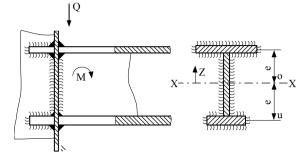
Fillet welds stressed by bending moments and shear forces
